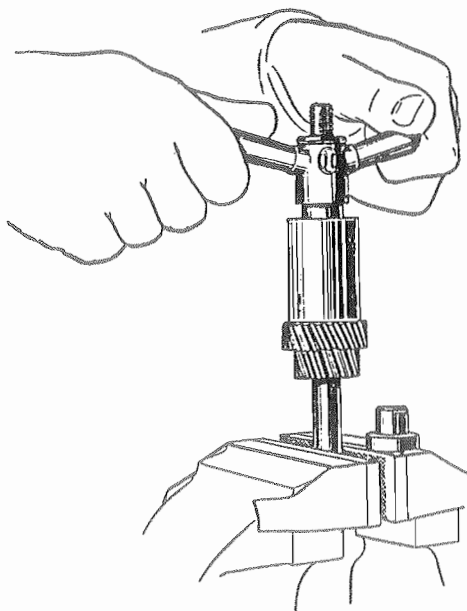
REMOVING DRAWN CUP NEEDLE BEARINGS
